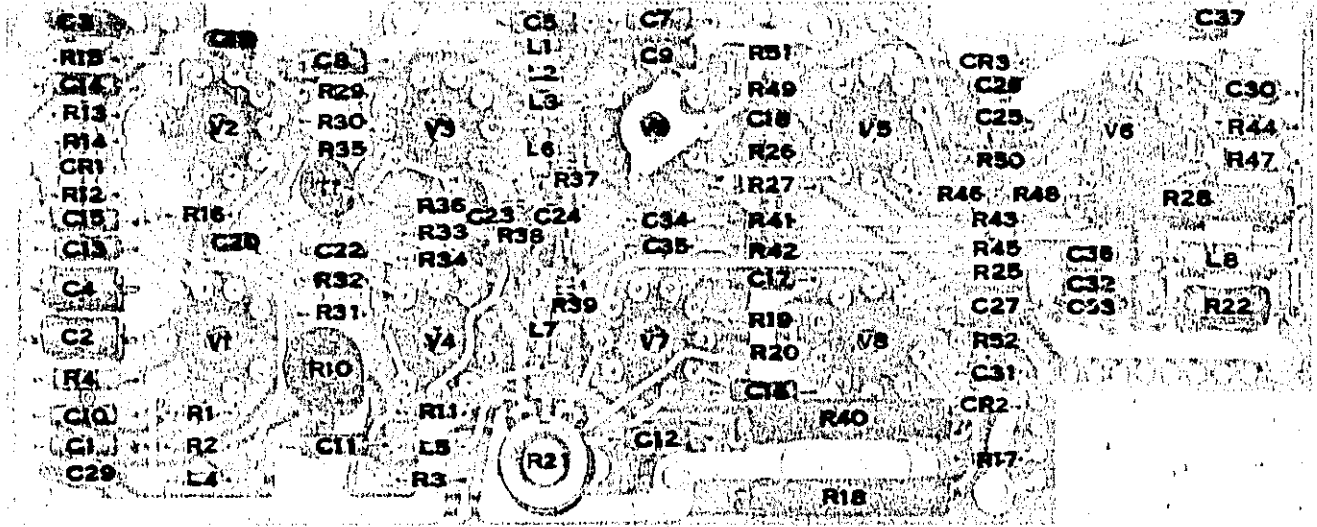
Etched Circuit A4 Oscillator Amplifier Assembly Component Locations
